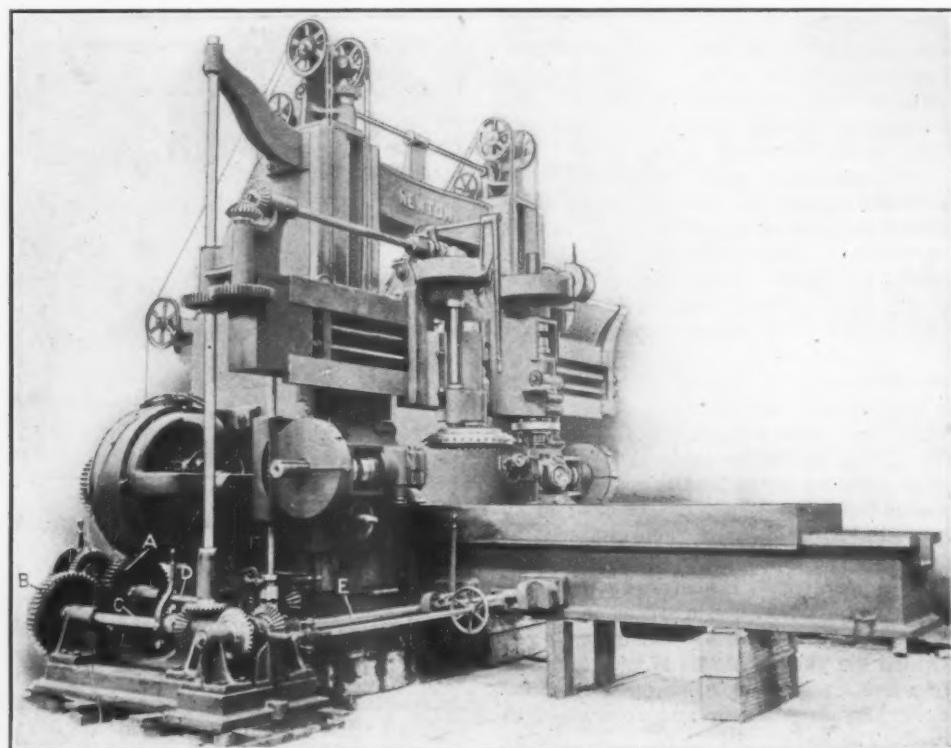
A Heavy Four-Spindle Milling Machine Built by the Newton Machine Tool Works for the Pennsylvania Railroad.
